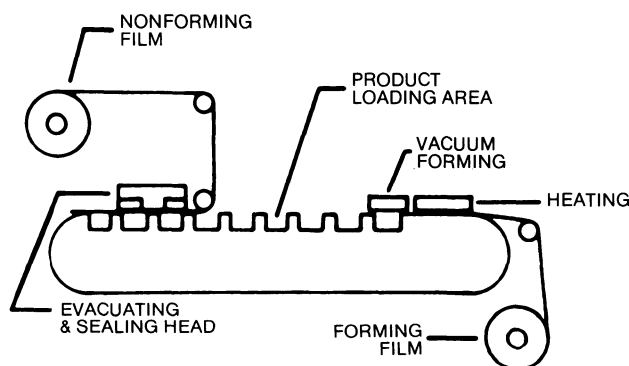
Schematic diagram of dieless vacuum packaging equipment illustrating how the film is formed, the produced placed in the package, evacuated, and sealed. Heating of the film is an essential step before forming. Courtesy of Curwood Inc., New London, Wisconsin.
